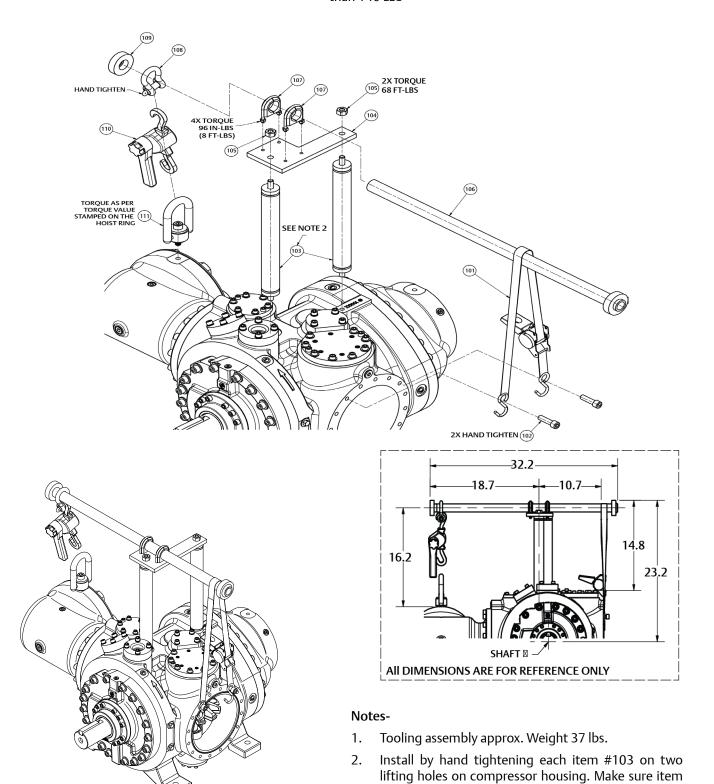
Tool (A24061A) To Handle Suction Tee Assembly
